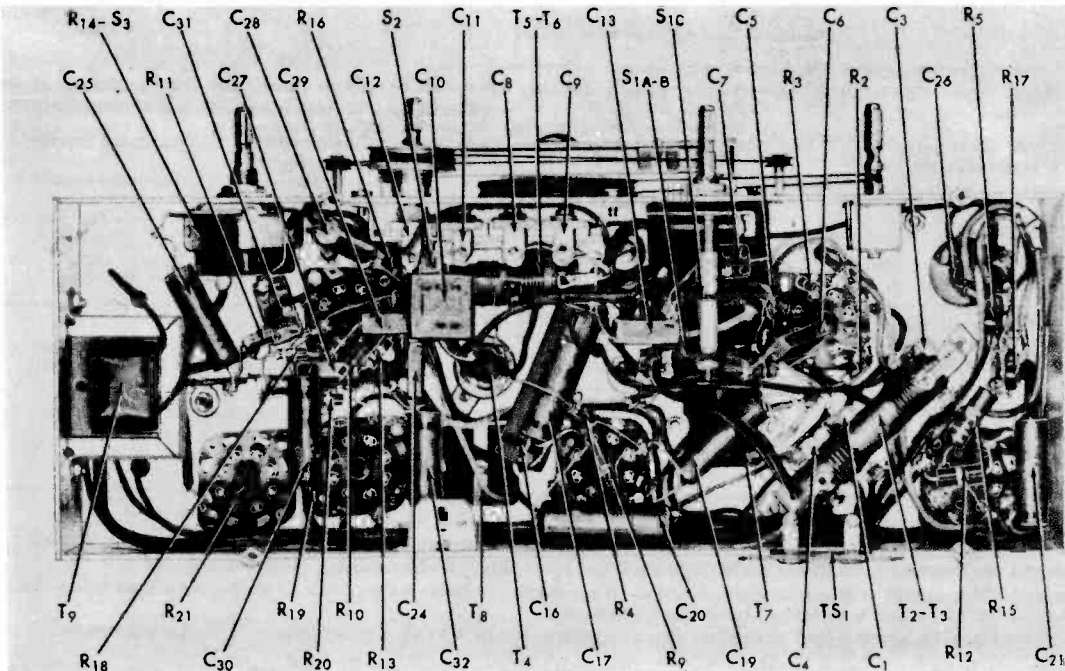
Models EX-102 and EX-103 bottom view of chassis showing location of component parts.
